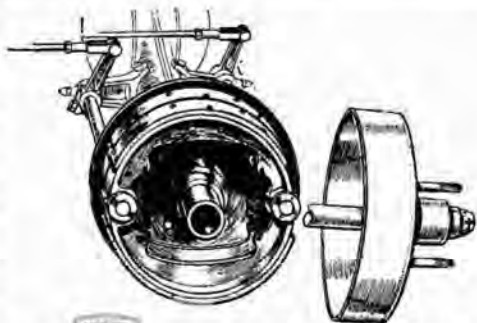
Two pairs of expanding brake shoes are housed in each rear wheel drum.
